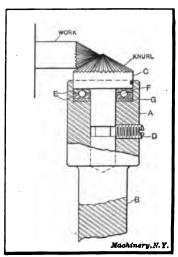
Bevel Knurl-holder used on the Cross-slide
